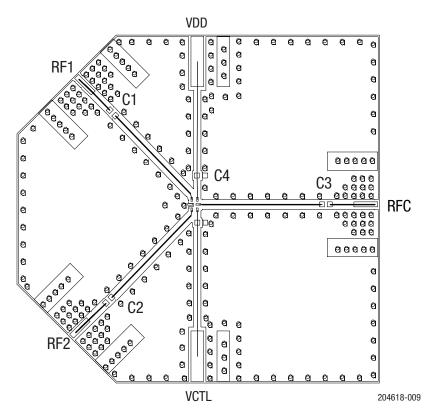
SKYA21024 Evaluation Board Assembly Diagram
